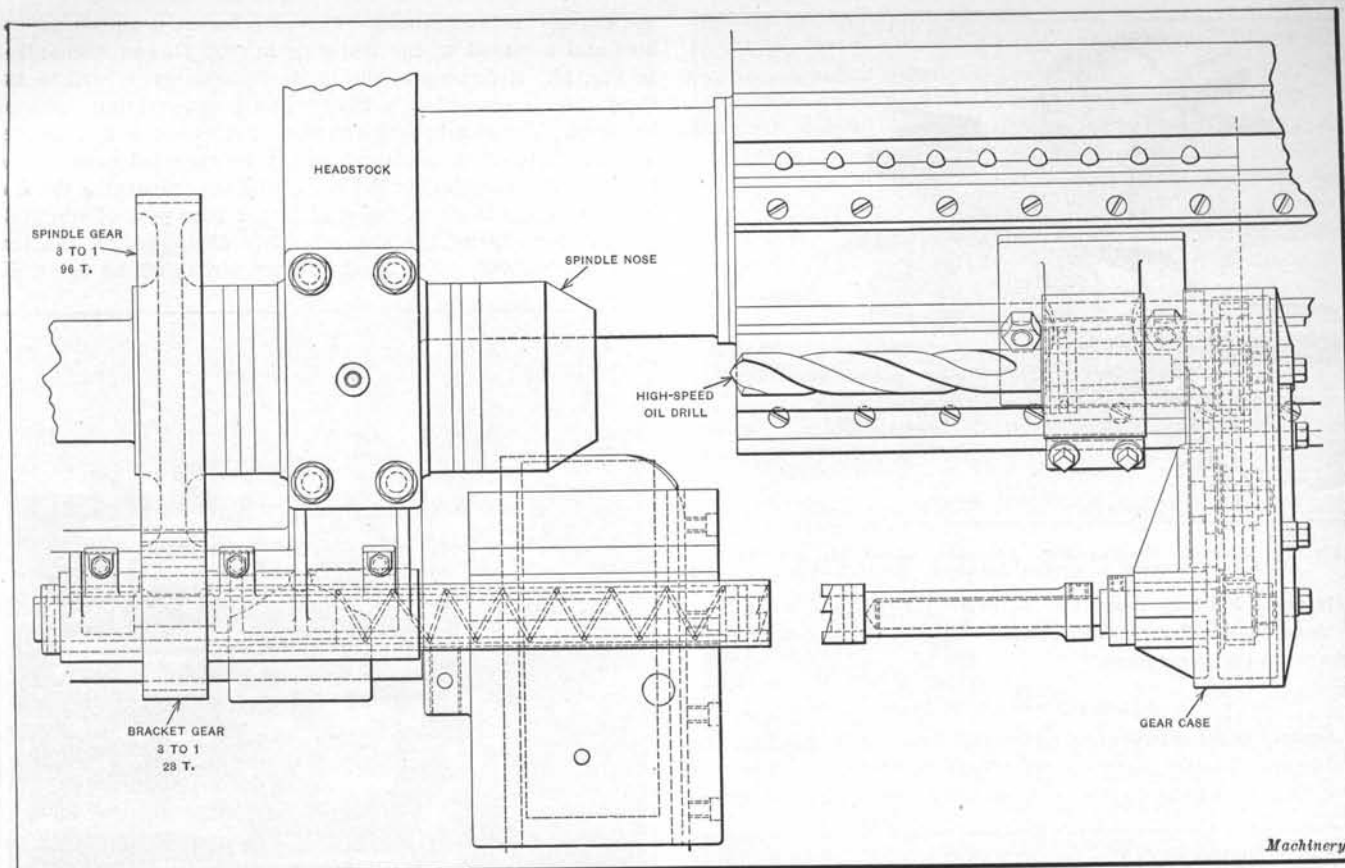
Detail View of High-speed Drilling Attachment shown in Fig. 23
